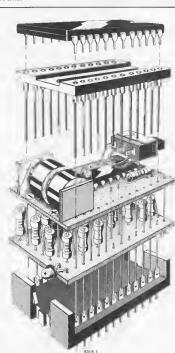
The exploded view of the constructional details. It is assential that care is taken during assembly to avoid malfunction.
